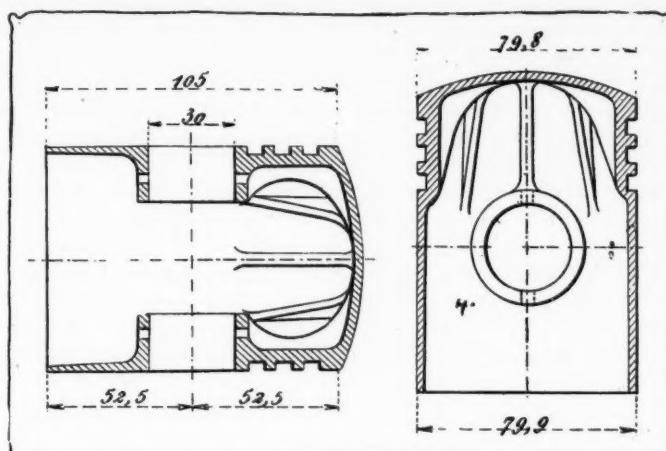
Dimensions and formation of piston made of aluminum alloy for cylinder bore of 80 millimeters
